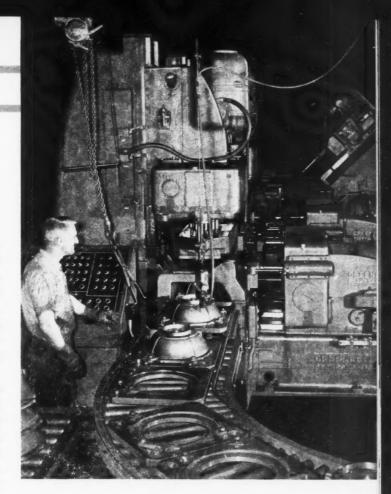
All holes in the bell housings for the Ultramatic drive units are machined on the twenty-two-station automatic transfer machine here illustrated
